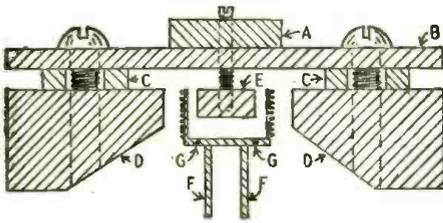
Cross-section of completed assembly at line X-X. A—coil mount; B—pole piece mount; C—C—magnet spacers; D—pole pieces; E—magnetic core screw assembly; F—needle chuck and coil; G—G—Coil suspension wires.
